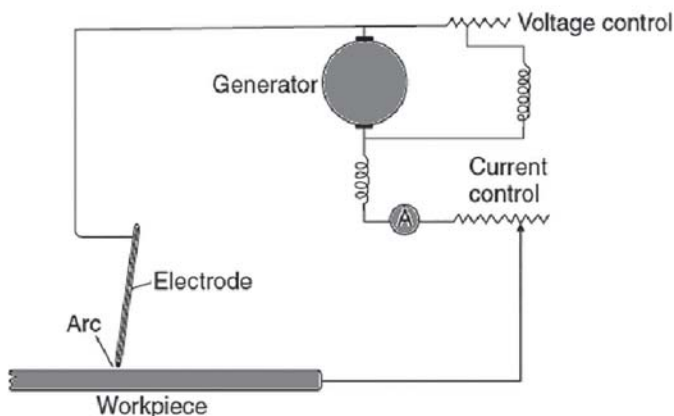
Circuit diagram of arc welding process [1]
